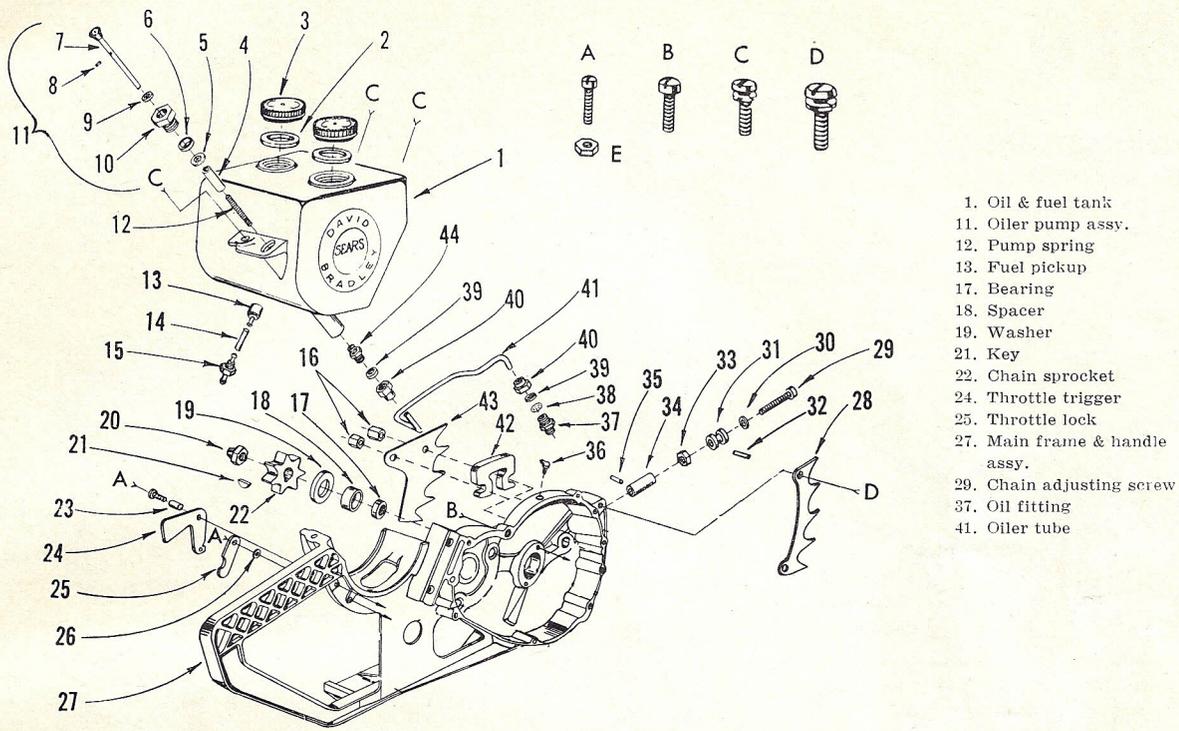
Exploded view of tank, frame and related parts of typical gear drive model.
